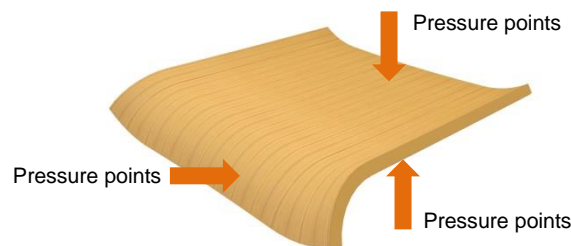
Illustration of pressure points to shape the laminated bamboo material
